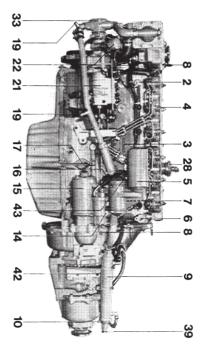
Port side, MD 32 A with Borg-Warner reverse gear Pos. No., see page 2
